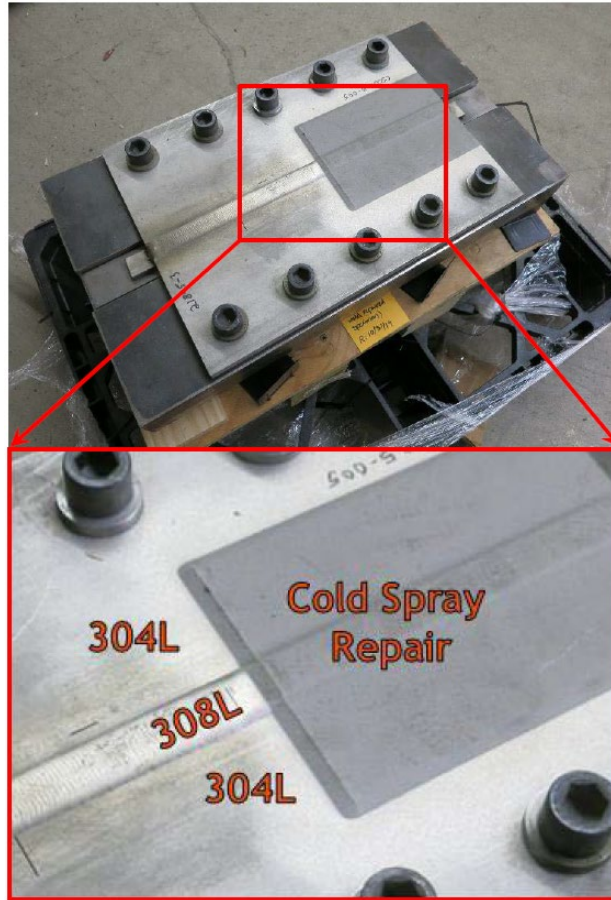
Completed weld assembly in the bolted and restrained condition [25]
